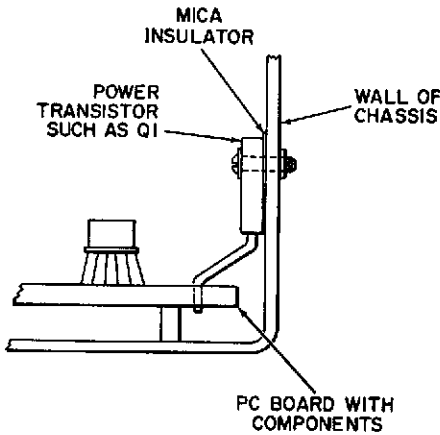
RECOMMENDED HEAT-SINK arrangement for power transistors in Figs. 1 & 2.
